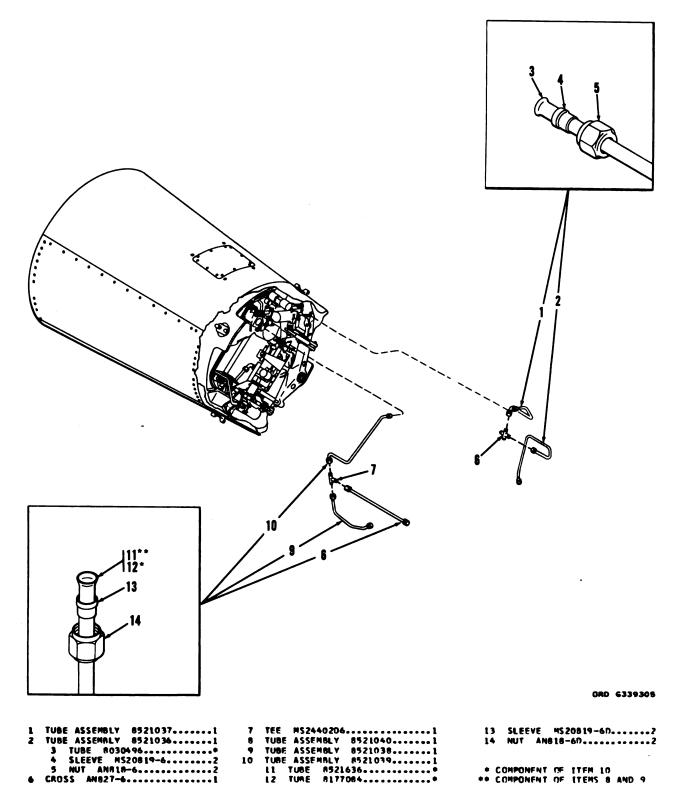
SYSTEM INSTALLATION, HYDRAULIC /9020507/
